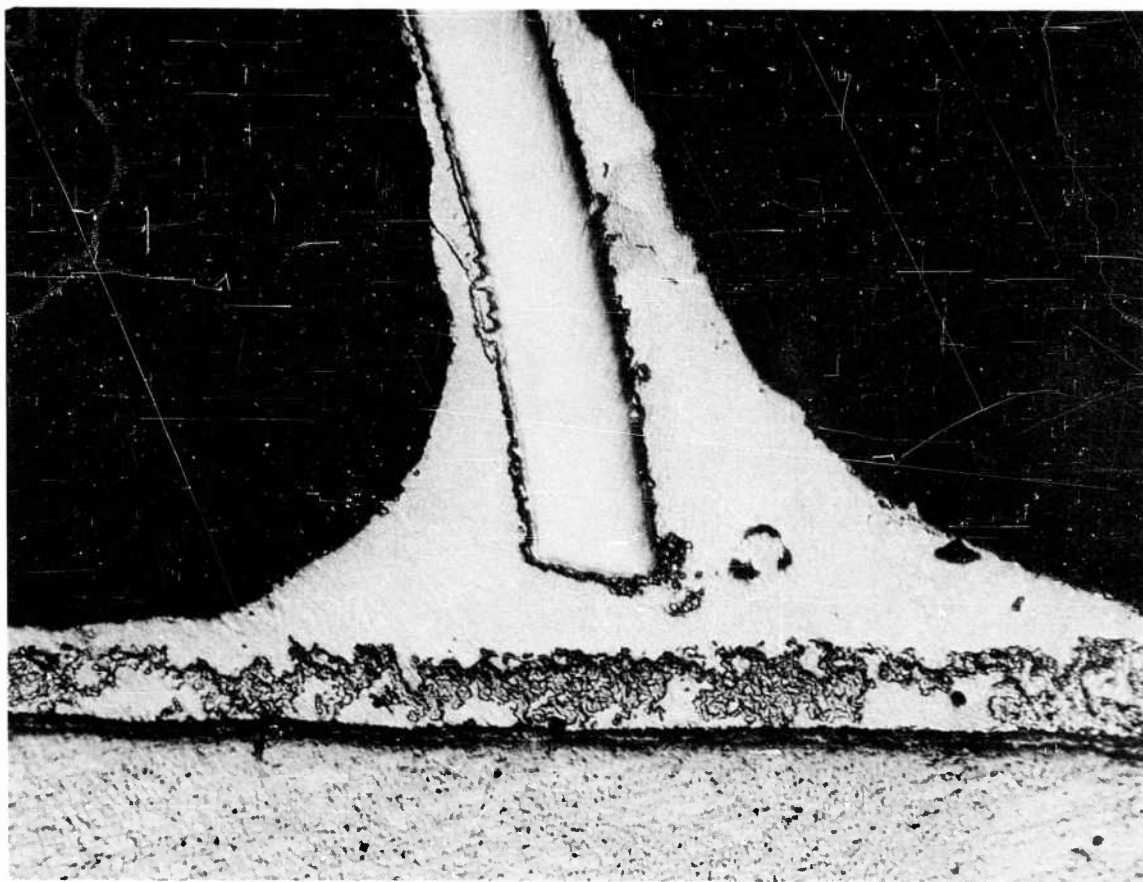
Beryllium Cross-Rolled Sheet to Titanium Core Joint in a Truss-Core Sandwich Furnace-Brazed Specimen, Using 50 Ag-15.5 Cu-15.5 Zn-16.0 Cd-3.0 Ni Brazing Alloy. Magnified 125X, Unetched
